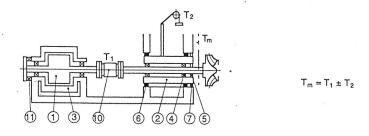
Arrangement using a torquemeter with machine bearings and seals in balance
